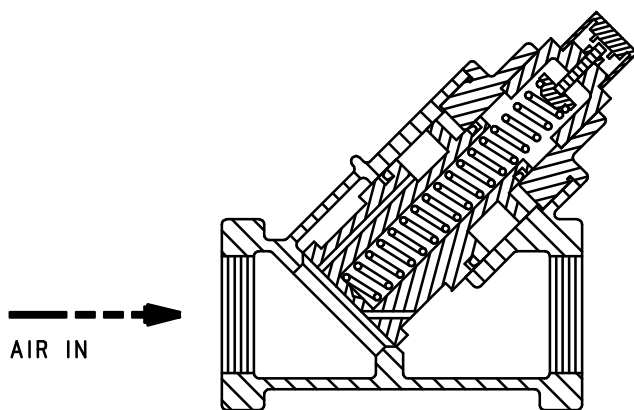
MINIMUM DISCHARGE PRESSURE VALVE
